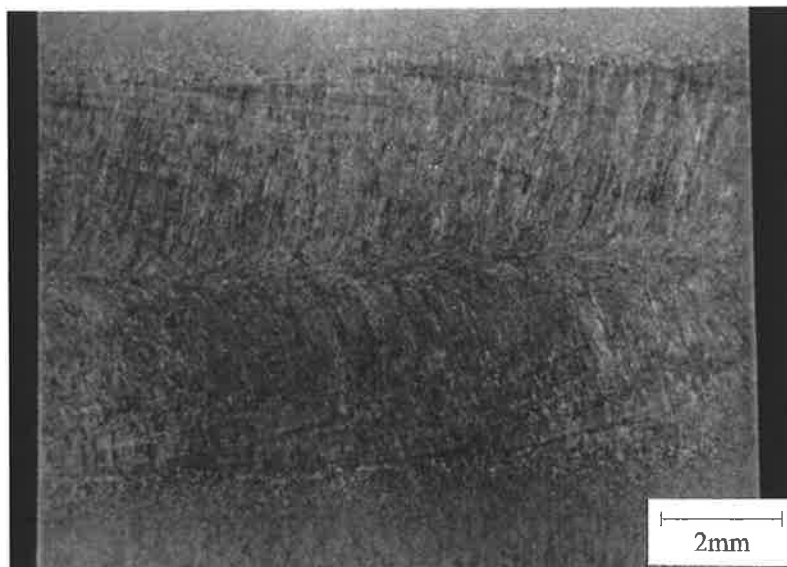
Longitudinal horizontal section of a weld made at 400mm/min and 188A (heat input equal to 0.74kJ/mm). In this weld the total number of hollow bead is 2 and the total length is 12mm.
